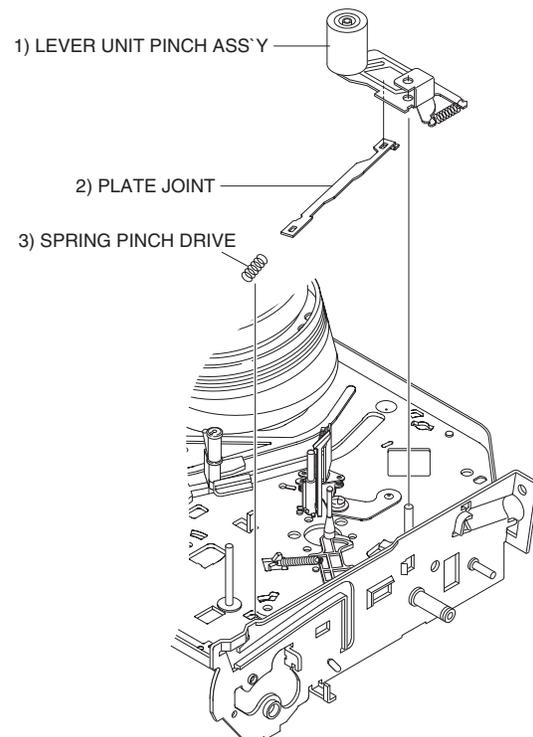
Lever Unit Pinch Ass'y, Plate Joint, Spring Pinch Drive Removal
